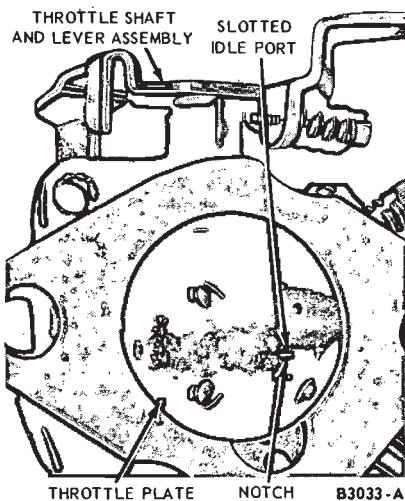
Throttle Plate Installation in Cast Iron Throttle Body
